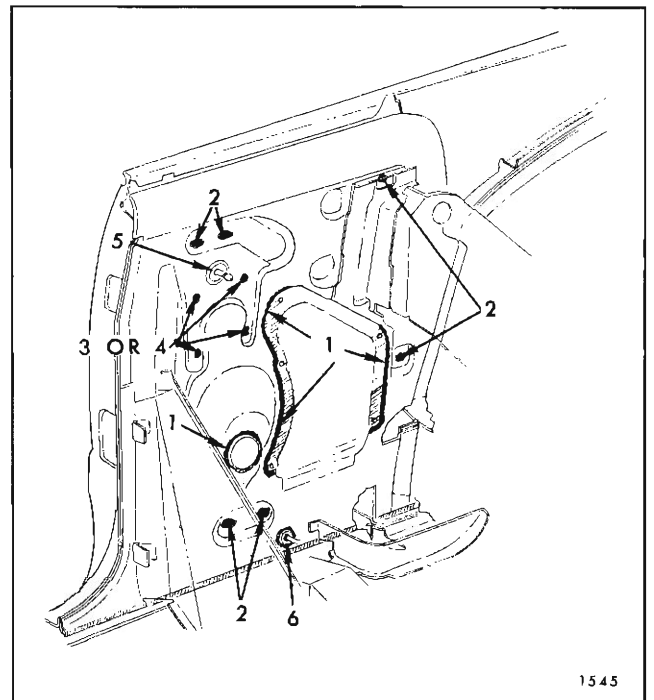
E13—Rear Quarter Inner Panel Sealing - "67" Styles
